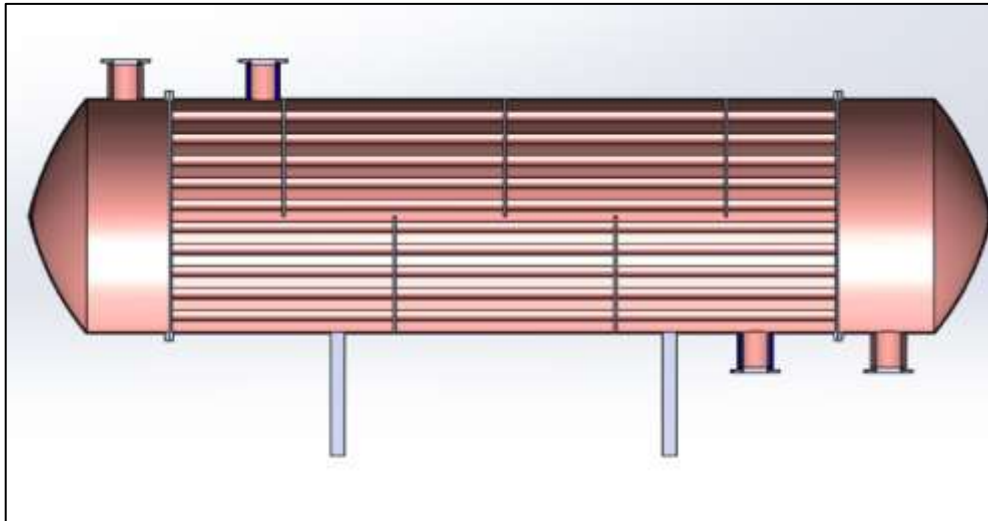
2D Section of the Shell and Tube Heat Exchanger.
